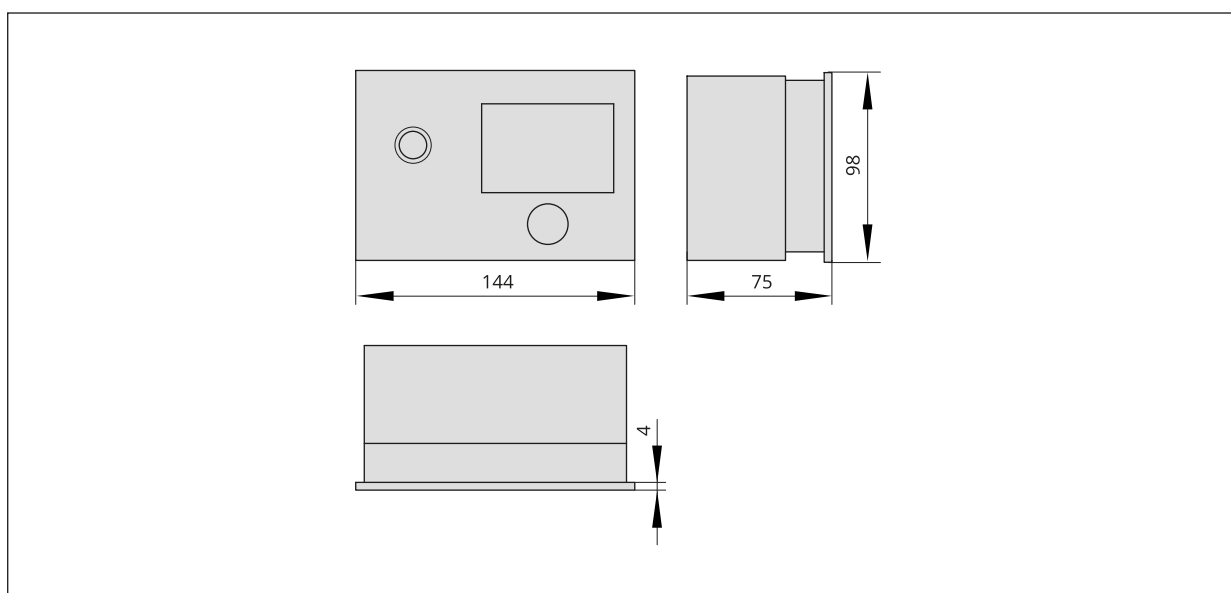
Dimensions in mm · Heating and district heating controller with high housing base
